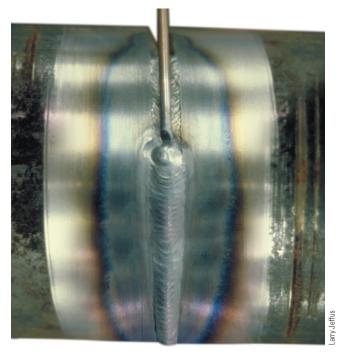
Leaving the filler metal fused to the weld pool makes it easier to continue the weld after you reposition yourself.
